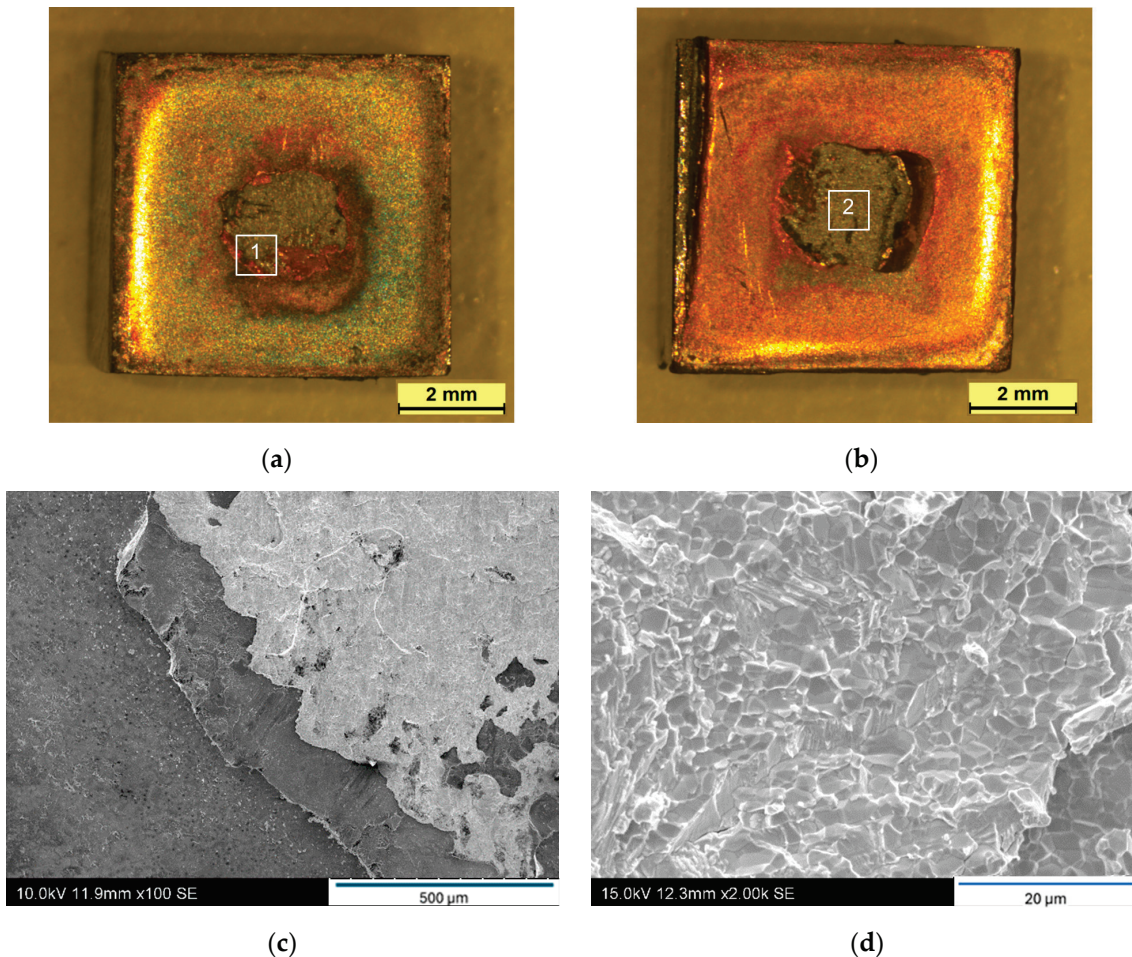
(a) EUROFER97 and (b) tungsten fracture surfaces of W-EUROFER97 joints using a Cu interlayer after the shear test. (c,d) detail the zones 1 and 2 marked in figures (a,b), respectively.
